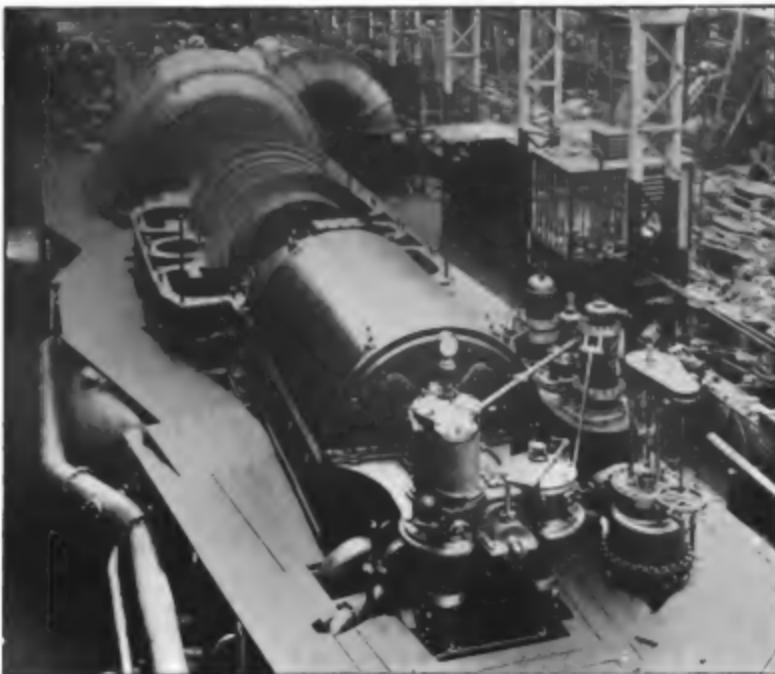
25,000 K.W. TURBO-ALTERNATOR.—MESSRS. C. H. PARSONS & CO., LTD., NEWCASTLE. THE PHOTOGRAPH SHOWS PART OF ITS CASING REMOVED.
